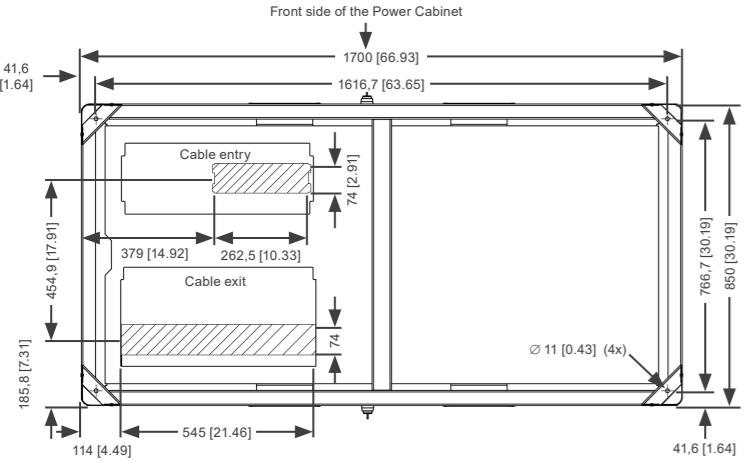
Mounting and cable routing dimensions for the Power Cabinet – mm [in]
